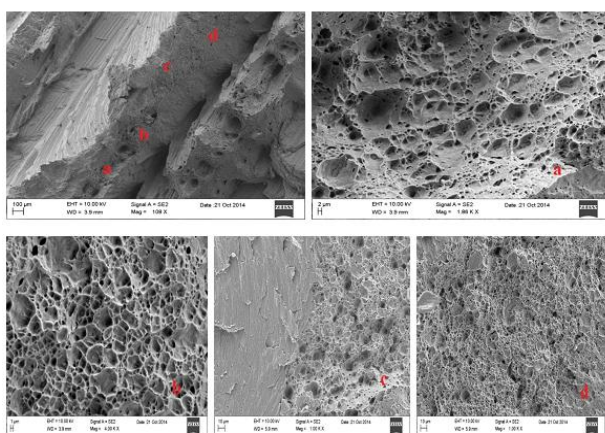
Fracture surface FESEM images for specimen no 2
